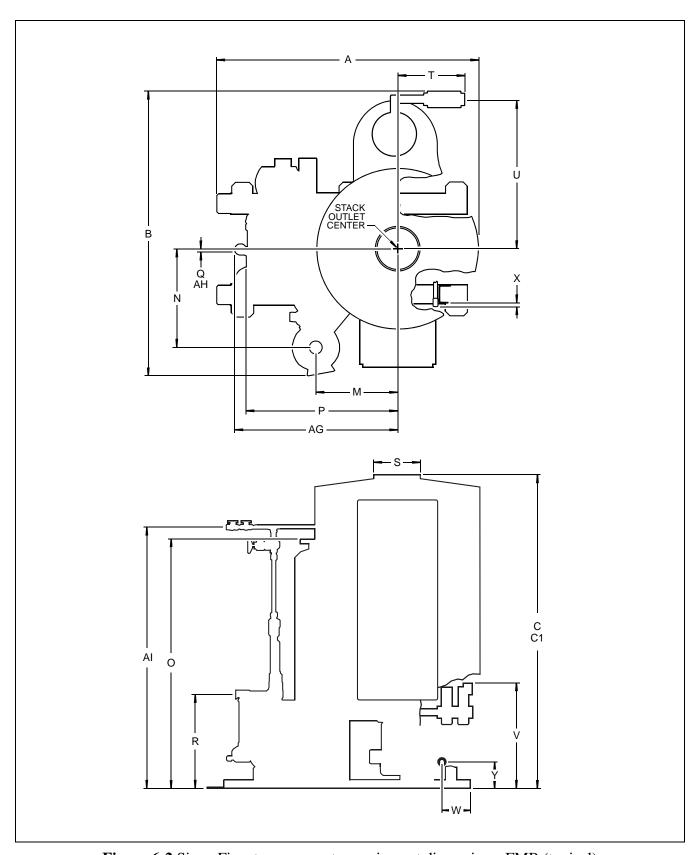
SigmaFire steam generator equipment dimensions, FMB (typical)
